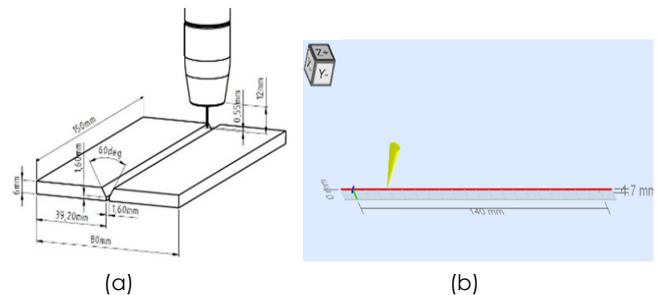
Design of experiment welding process (ISO 9692-1:2013(E)), (a) Dimension of the specimen and, (b) toolpath welding process
